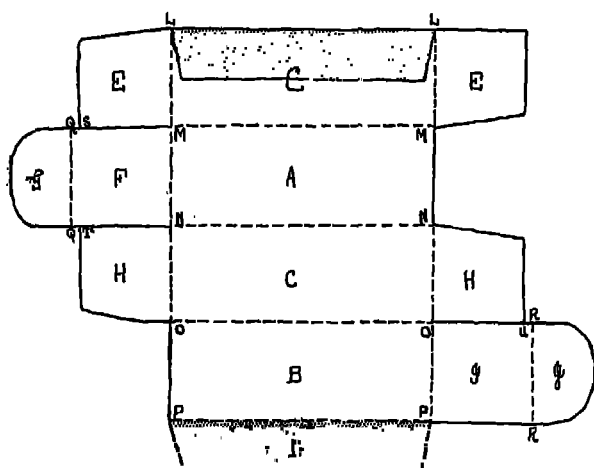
SINGLE-PIECE ROLL FILM PACKET.
